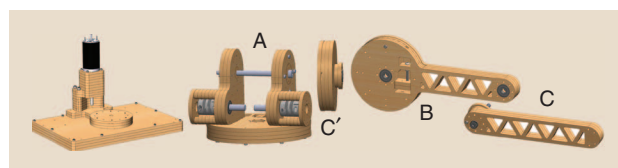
User assembly of the wooden haptics device. The 3-D structure is formed from plywood sheets by (a) press-fit finger joints, (b) stacking and aligning sheets with dowel pins, (c) creating a tensioning mechanism, and (d) mounting the subassemblies (bodies) with high-quality rods and bearings.
